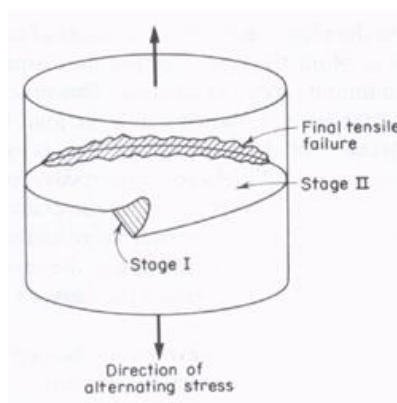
Location of the Three Steps In a Fatigue Fracture Under Axial Stress
